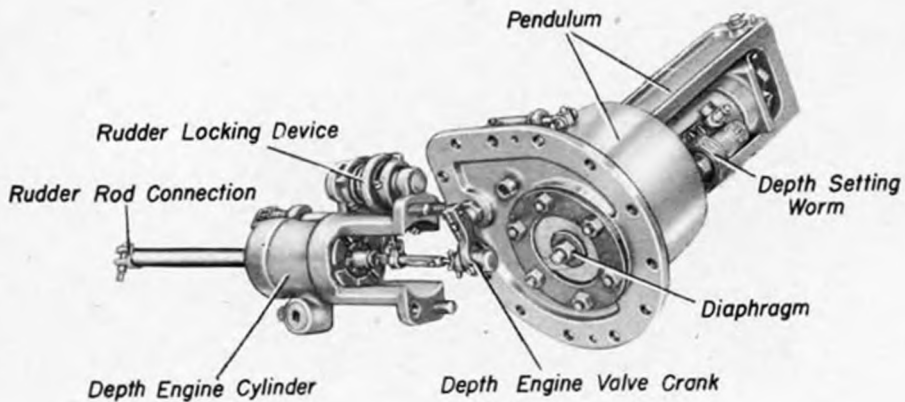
Torpedo Type 91 Mod 3, Depth Mechanism
